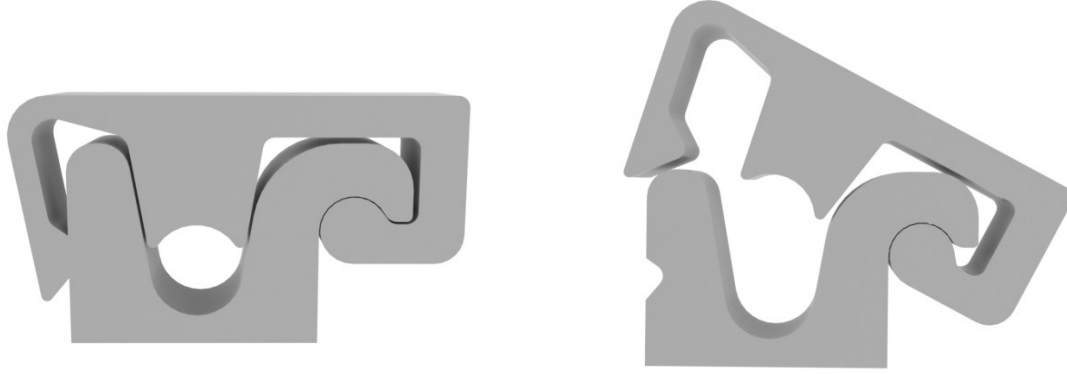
A 3D model of the hinge-clamp. The thickness of the top and bottom clamp parts is 2.5mm. The diameter of the tube notch is 1.6mm.
